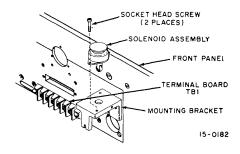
Removal of Solenoid Assemblies L1 and L4.
